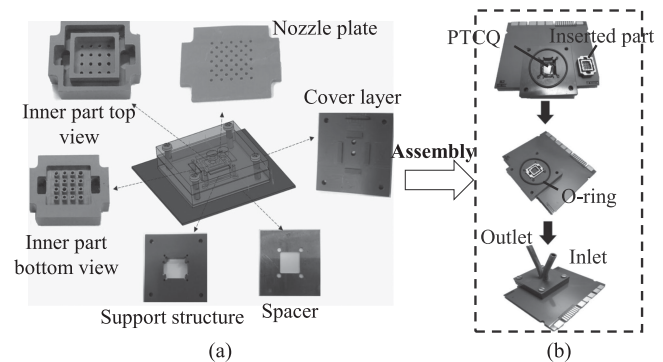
(a) Different fabricated parts of the  $4 \times 4$  array demonstrator of the impingement cooler. (b) Final assembly of the  $4 \times 4$  array demonstrator of the impingement cooler and integration on the test chip and PCB.
